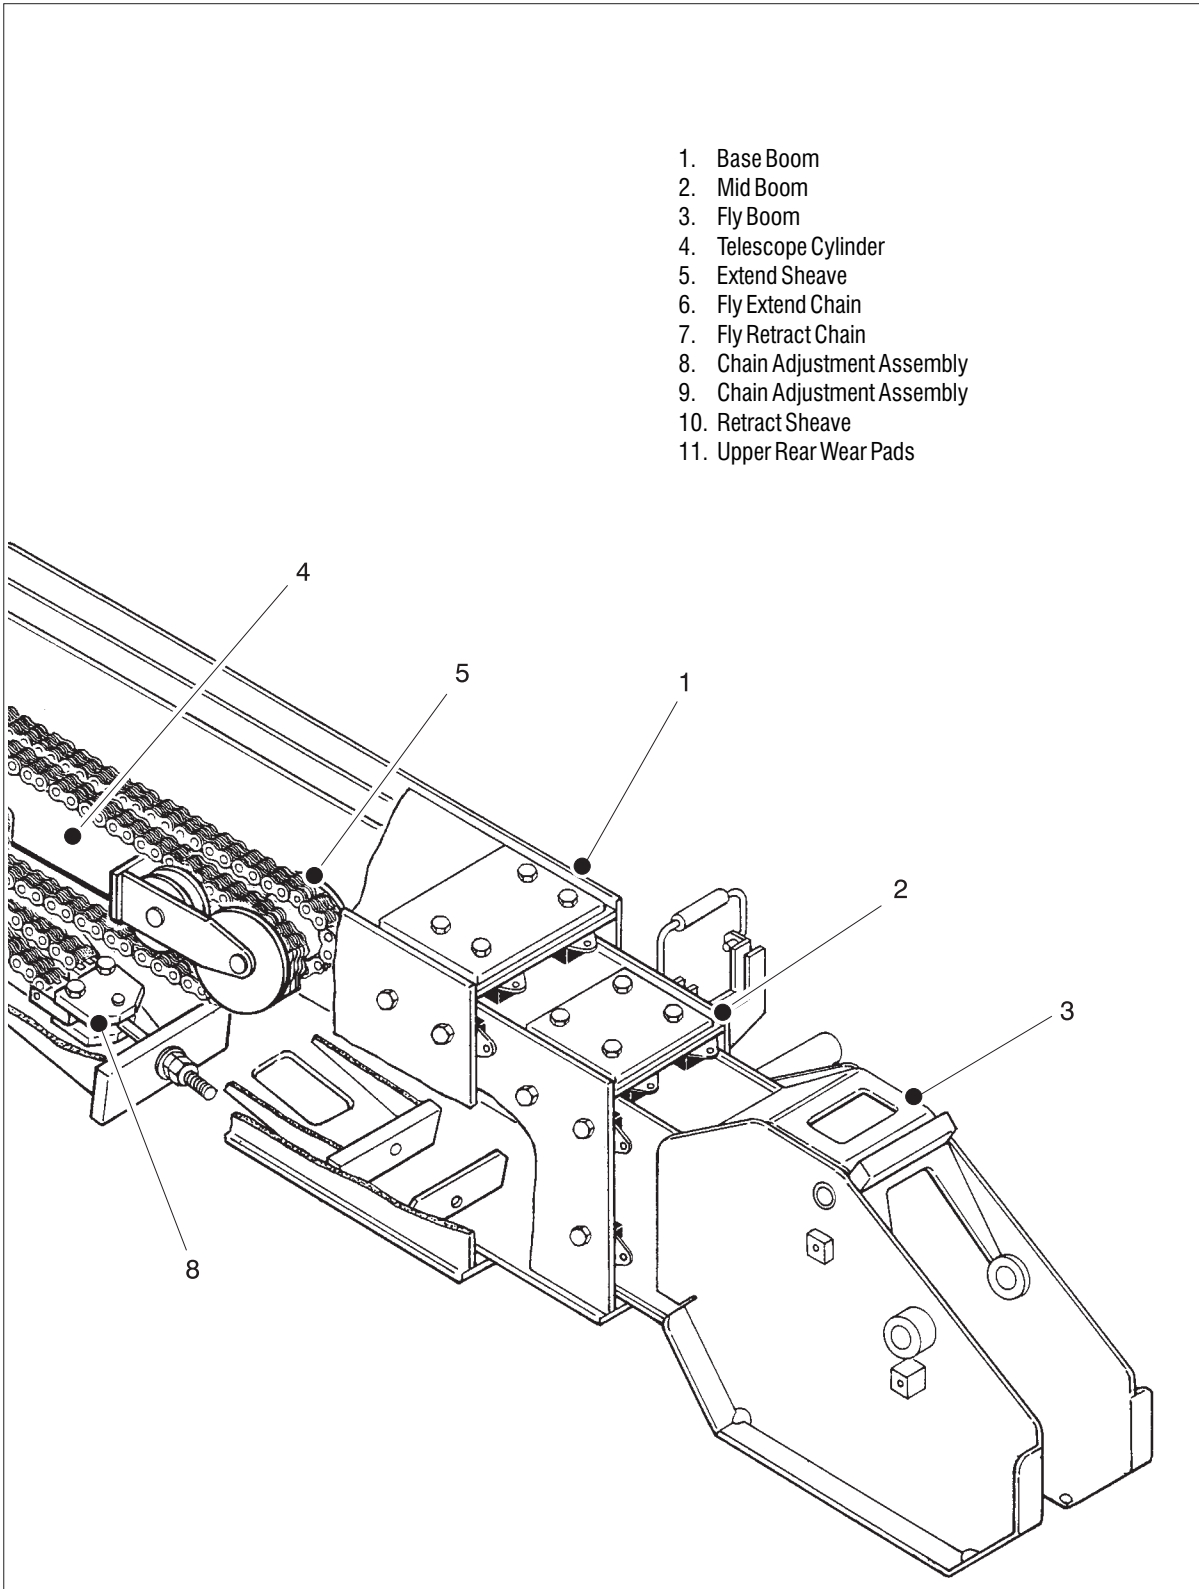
Main Boom Assembly - Sheet 1 of 2
